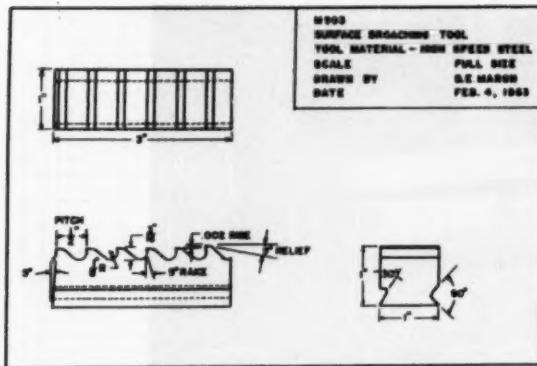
STANDARD TOOL DESIGN USED IN SURFACE BROACHING
